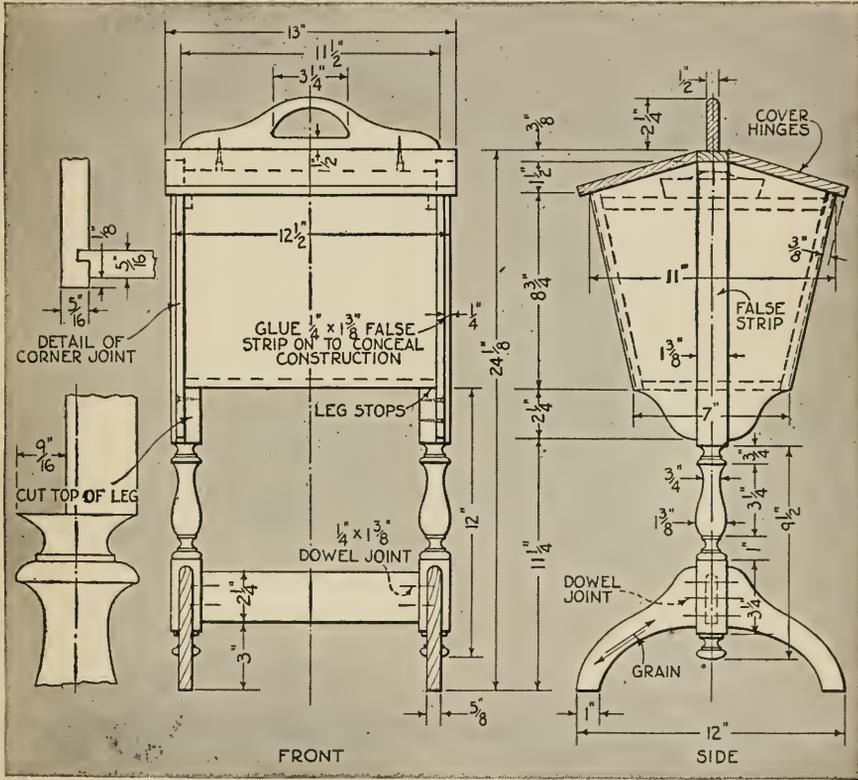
Assembly views of the Priscilla cabinet and details of the joints at the corners of the hopper and between the legs and end pieces.
